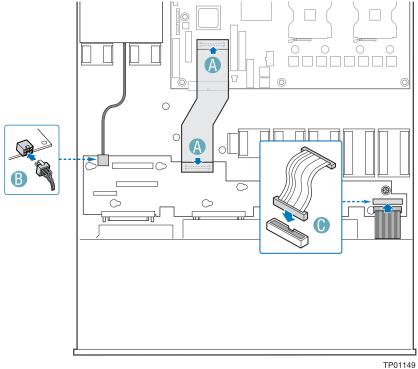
Connecting the Flex Cable, Power Cable, and Front Panel Cable
